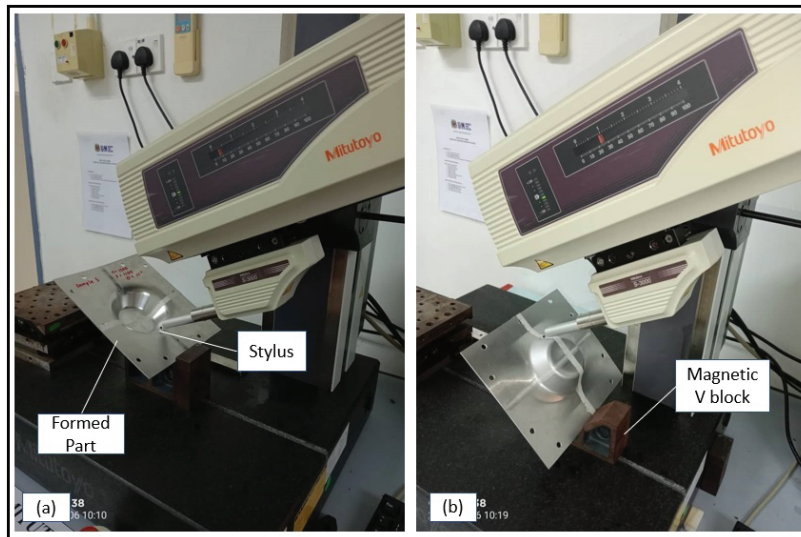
Surface roughness measurement setup (a) inner surface (b) outer surface
